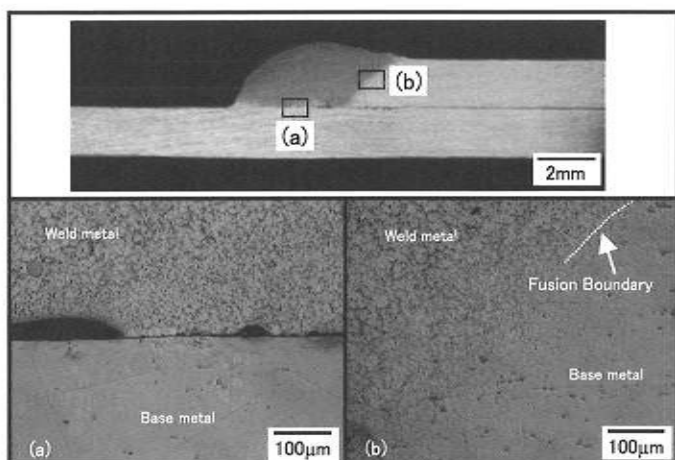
Microstructure at fusion boundary of cross section of MIG lap joint weld with insufficient penetration at welding current 58 A and welding speed 150 cm/min; (a) Lower sheet side, (b) Upper sheet side.
